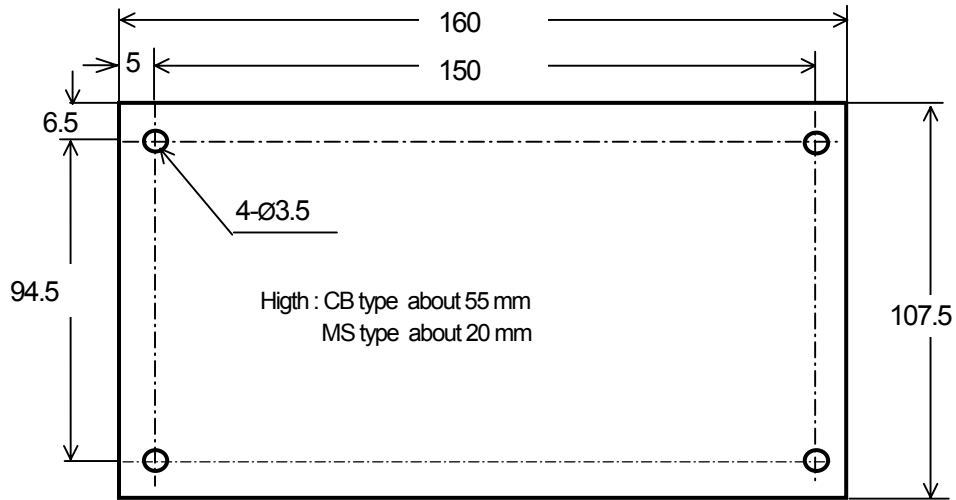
2-1 Dimensions of Main and Connector Boards
